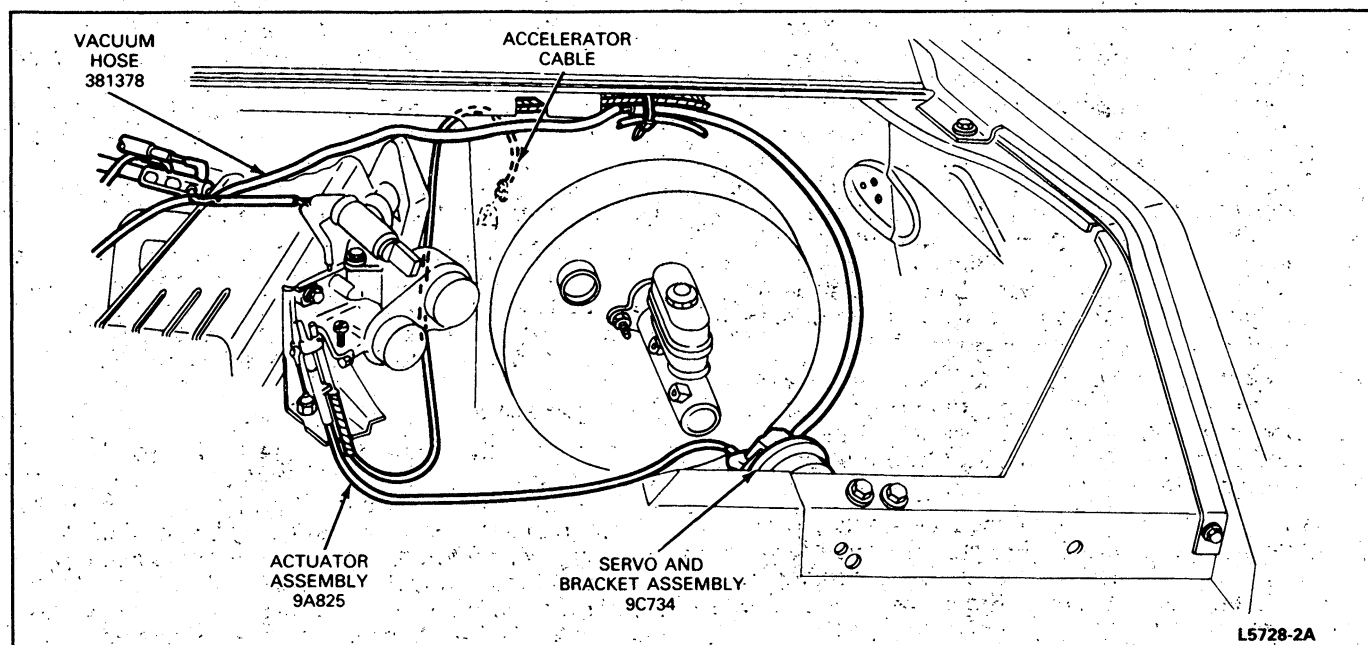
Servo and Cable Installation—E-150—E-350—4.9L EFI Gasoline Engines
